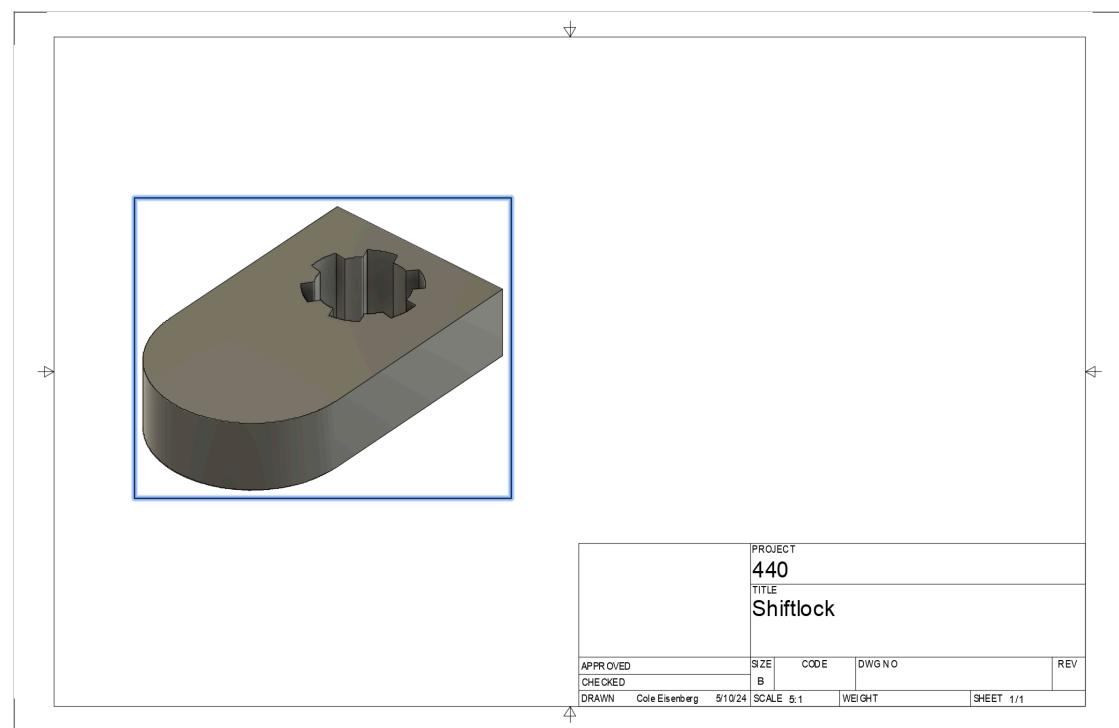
Press Fit Shifter Knob Locking Mechanism
